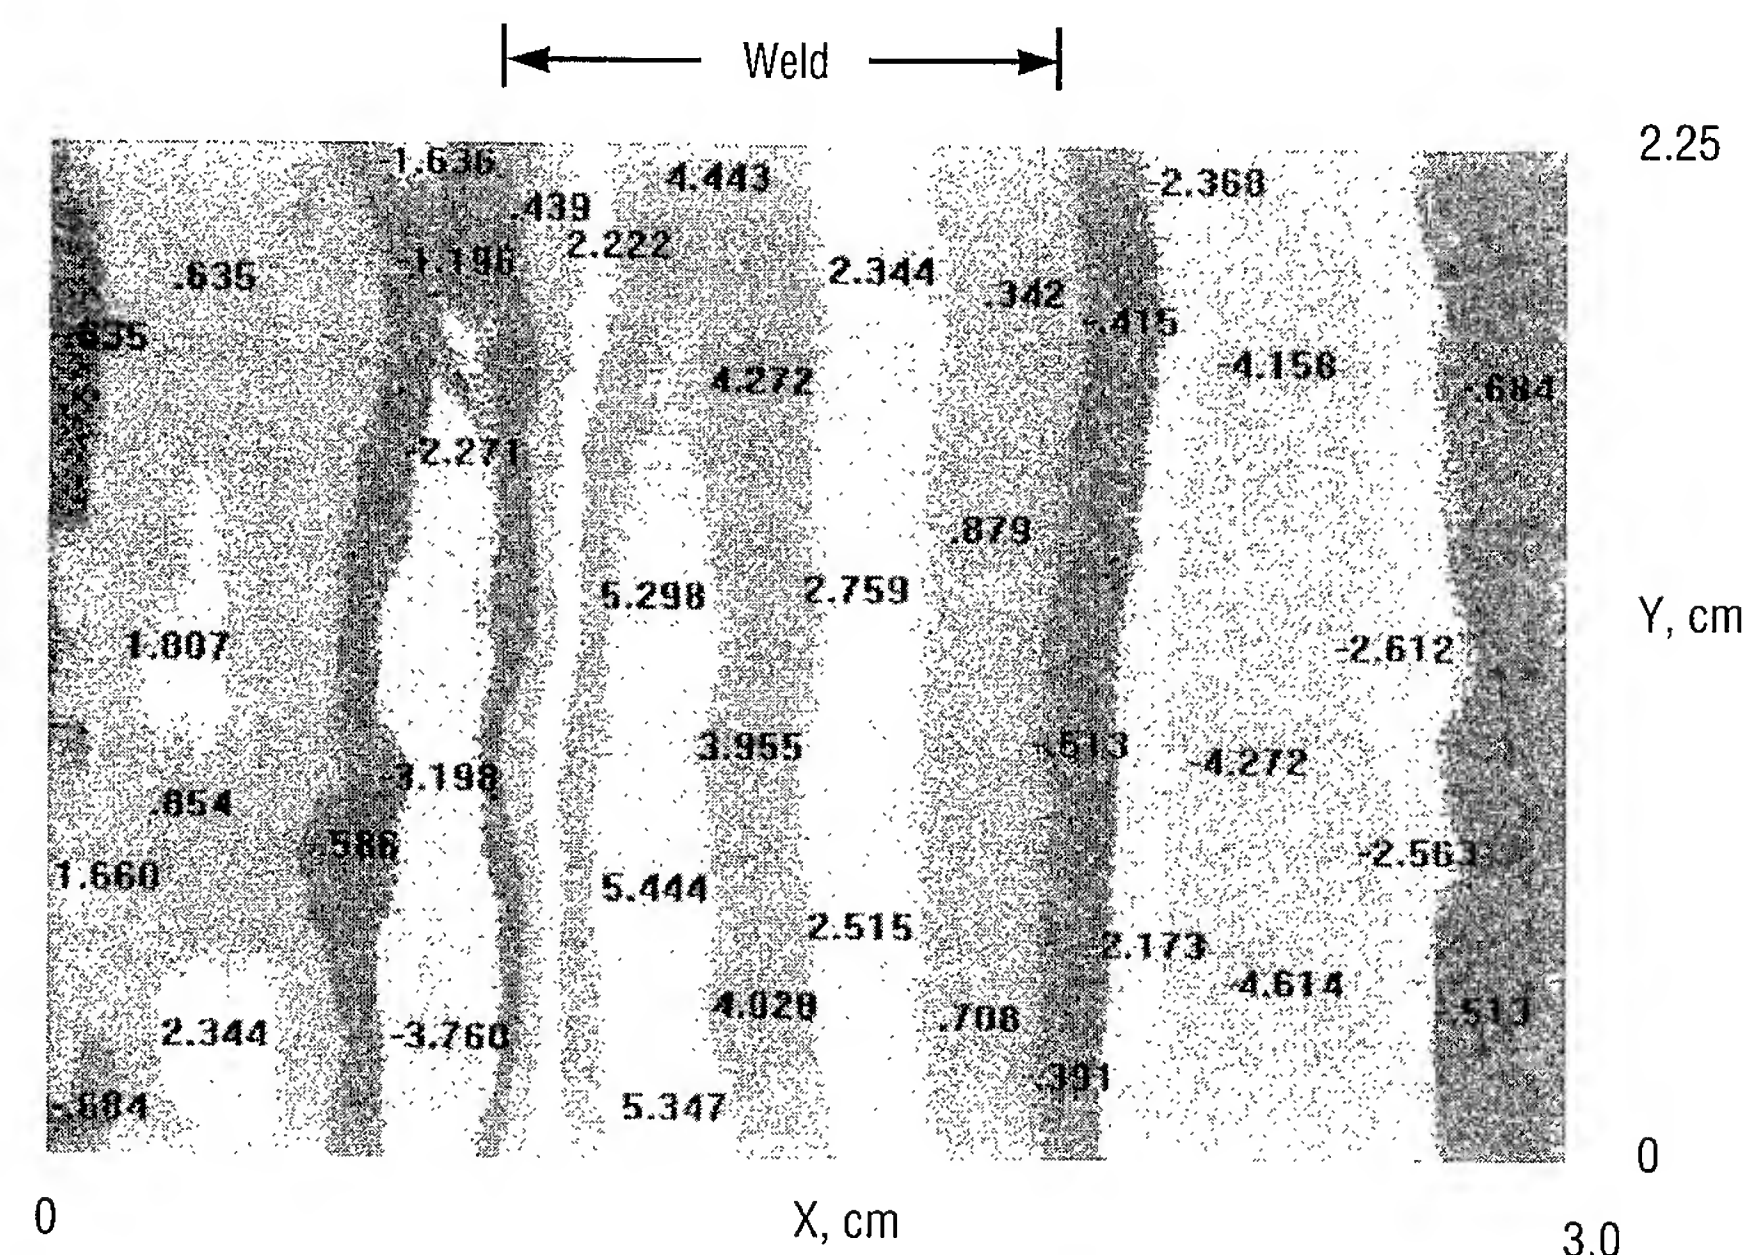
Localized corrosion in welded 2195 aluminum-lithium alloy (4043 filler).
